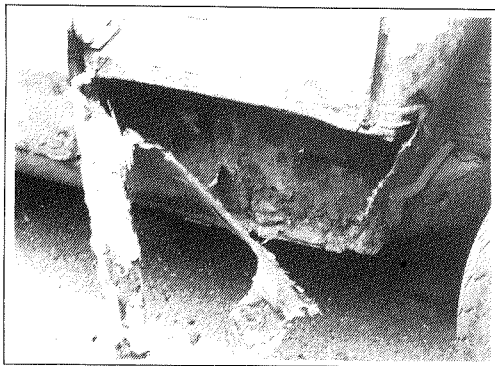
The extent of corrosion isn't revealed until the sill is removed.
